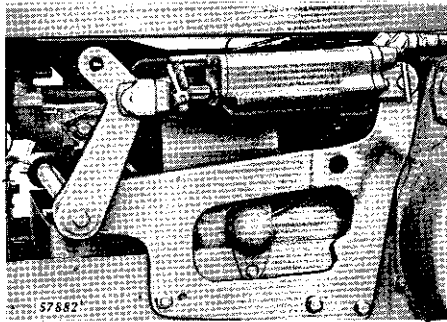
Left-Hand Side of Both "Solid" and "Split" Front-Mounted Rockshafts
